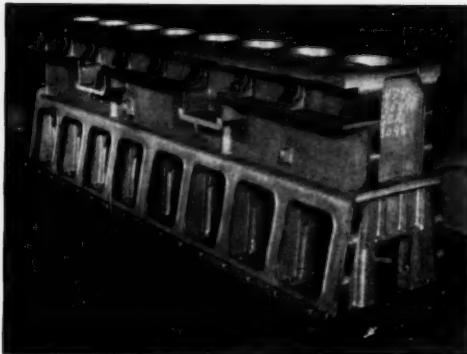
Welded steel vertical diesel engine frame.
